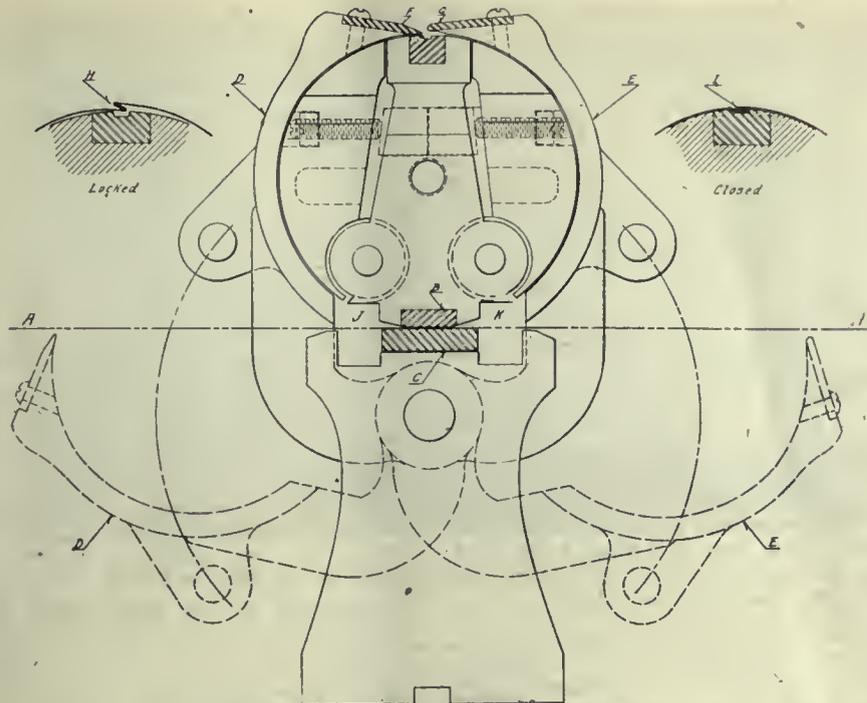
THE ATTACHMENT FOR BENDING THE FLAT SHEET TO CYLINDRICAL SHAPE.
